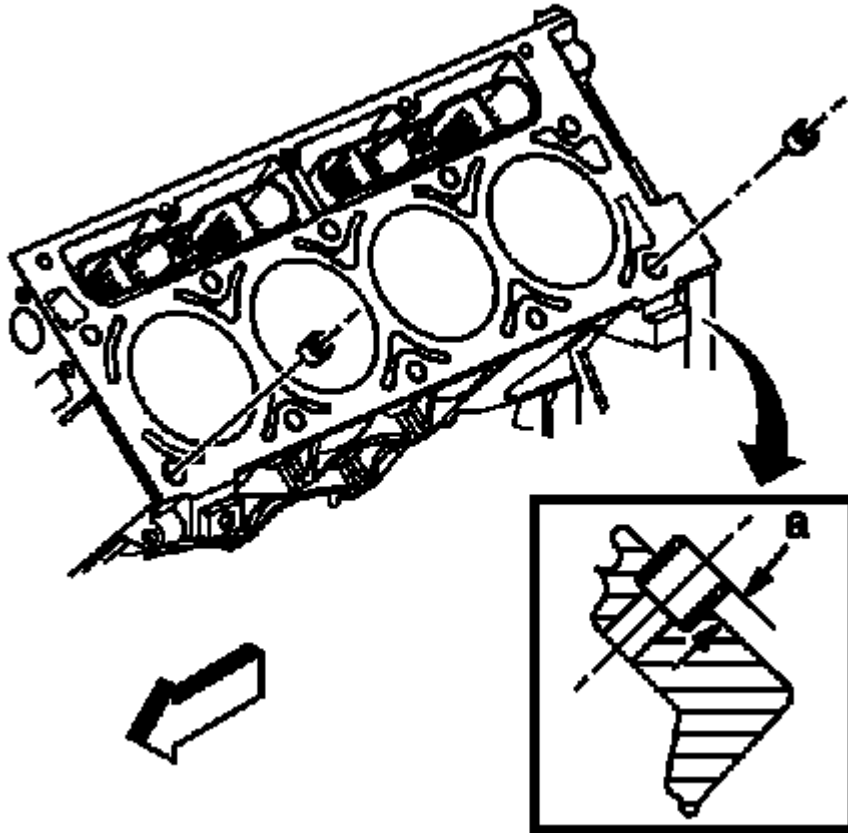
View Of Cylinder Head Gasket & Locating Pins
